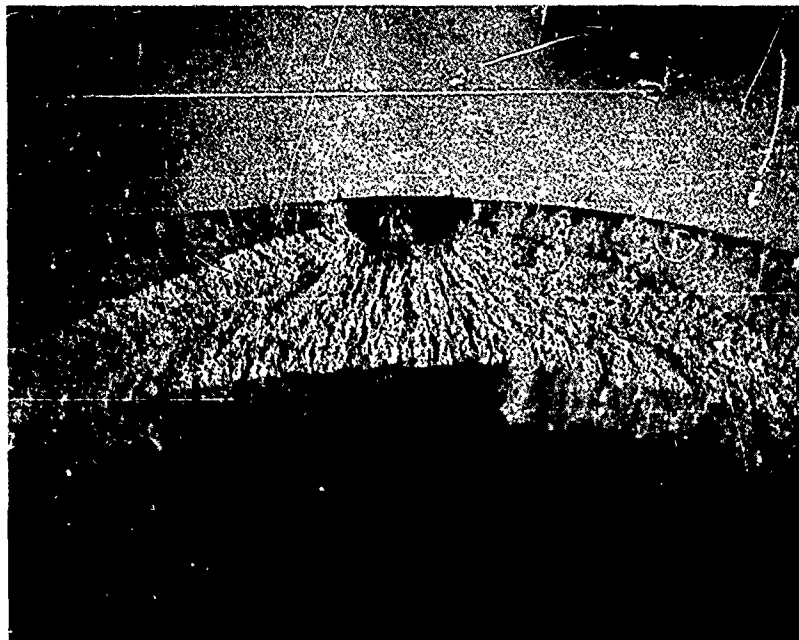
FAILURE ORIGIN OF 4330V MODIFIED STEEL
